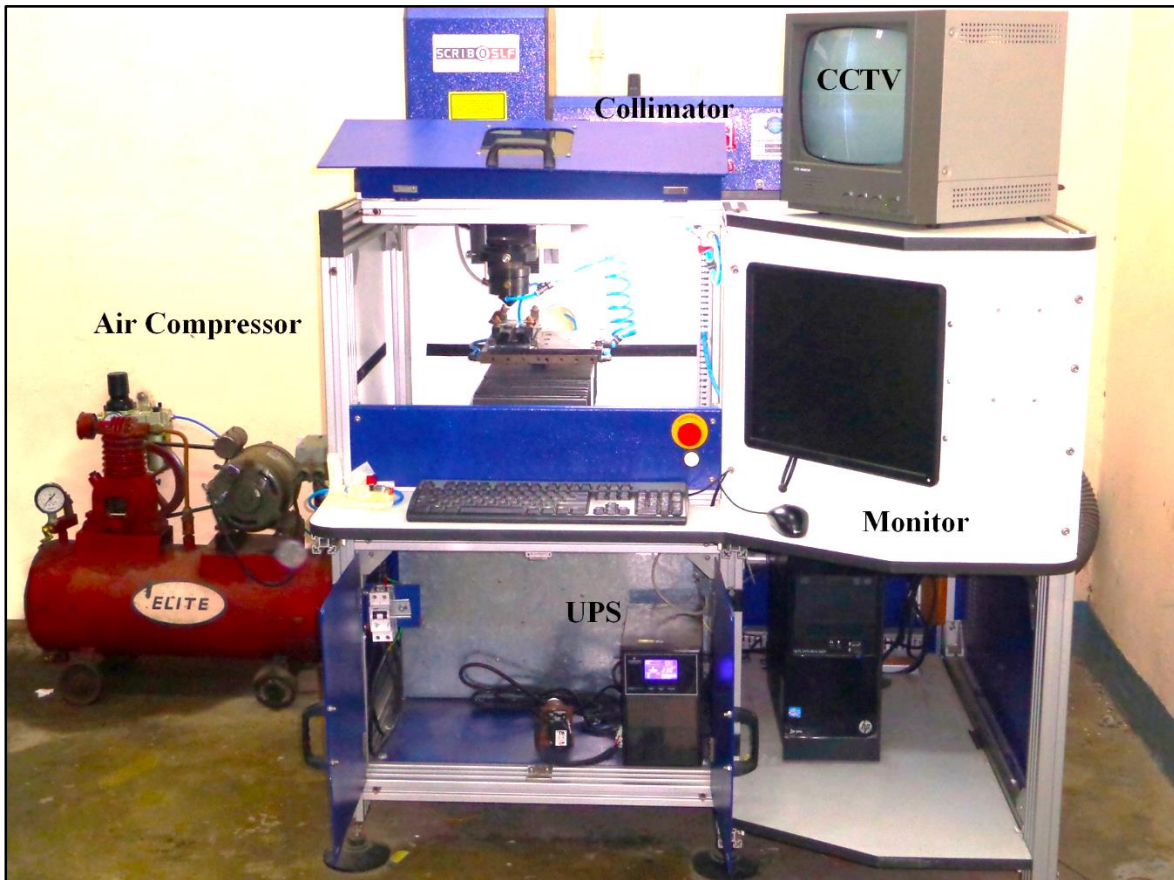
Photographic view of CNC pulsed fiber laser machining system
